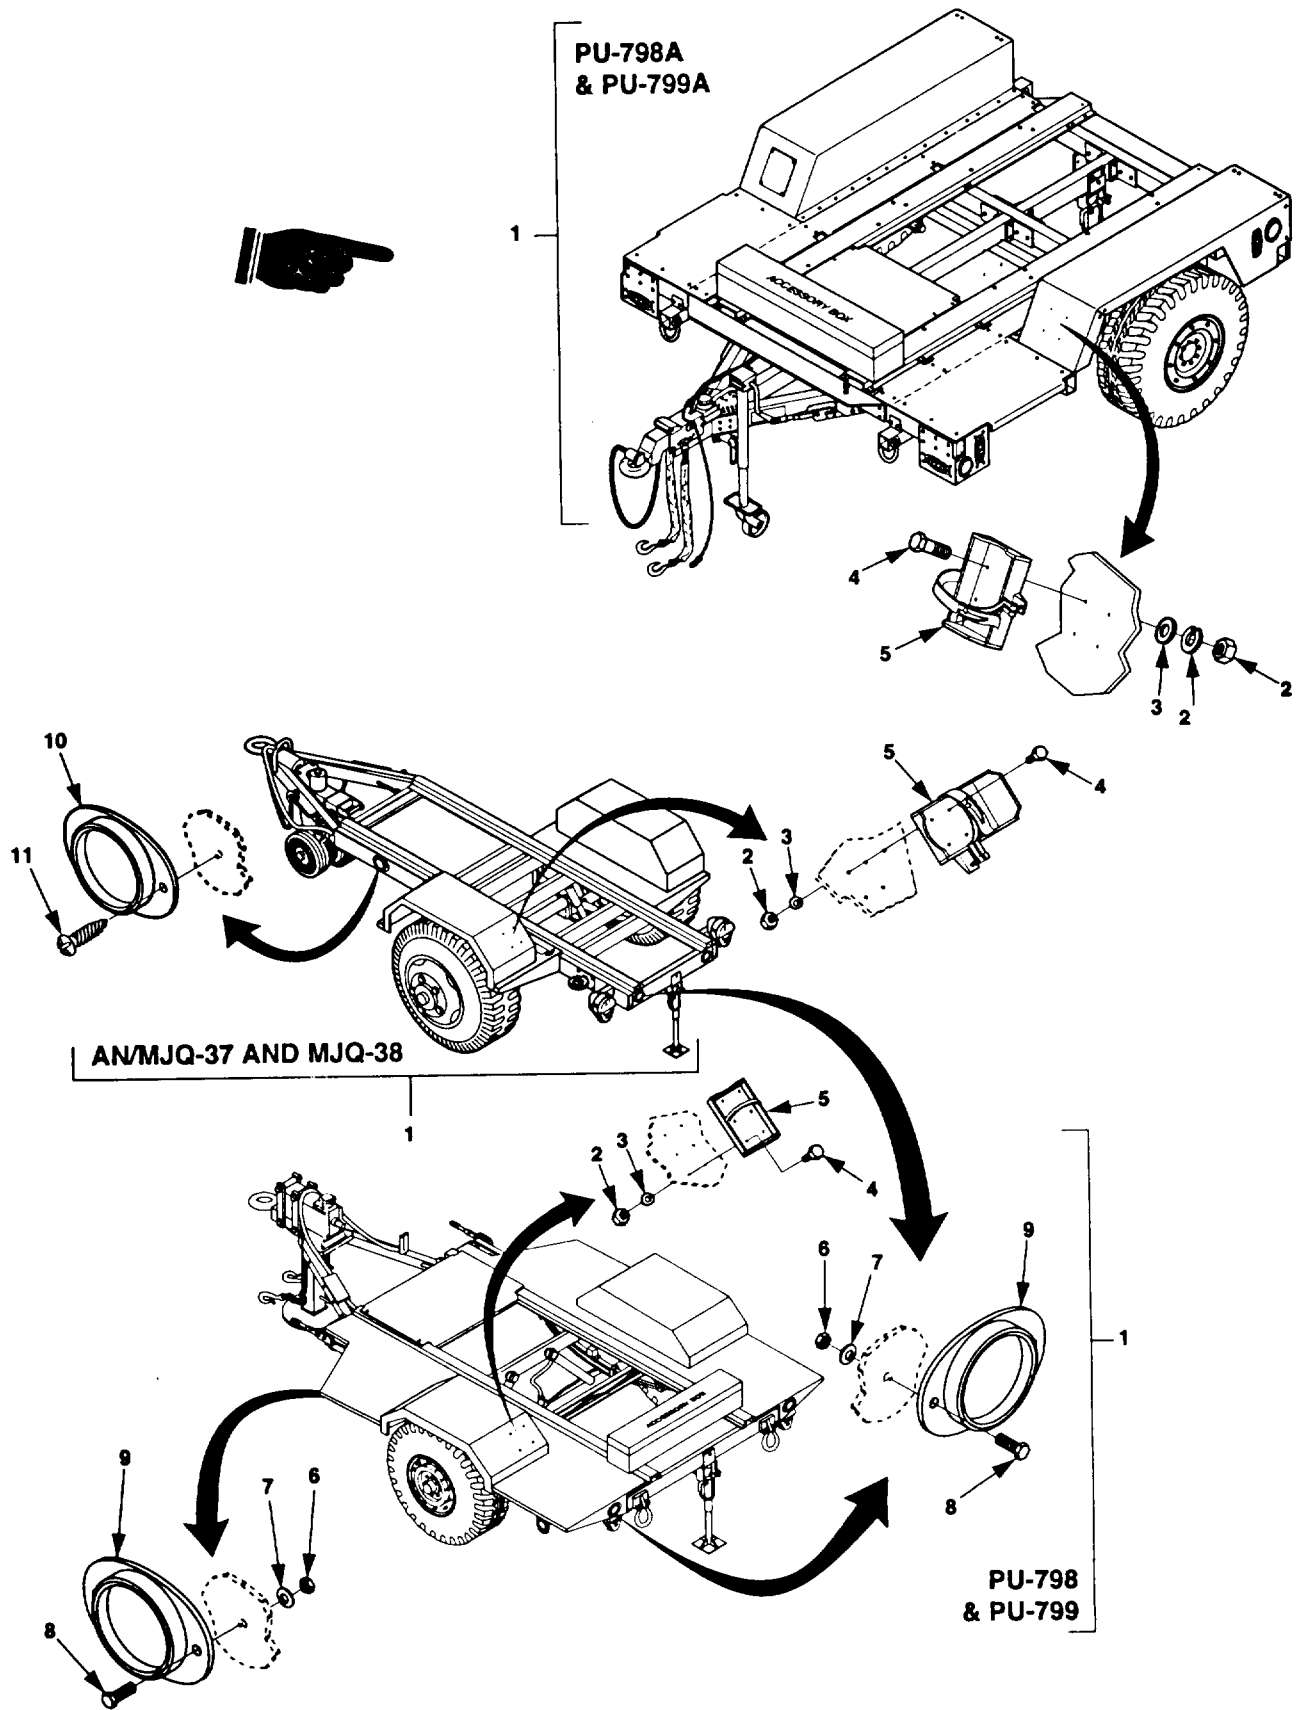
Power Plant/Power Unit Trailer Assembly (Sheet 1 of 2)
